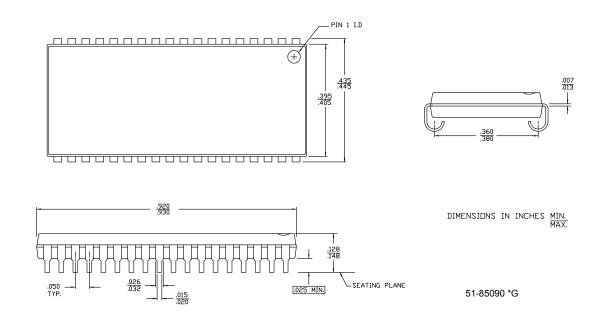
36L SOJ V36.4 (Molded) Package Outline, 51-85090
